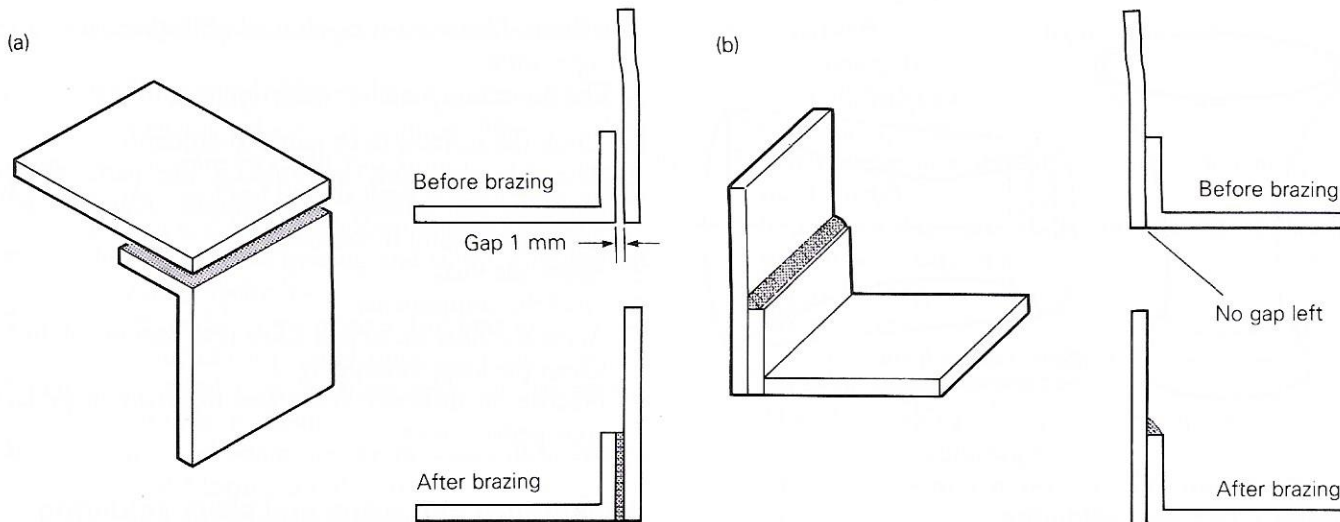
Brazing joint clearances: (a) right; (b) wrong.
